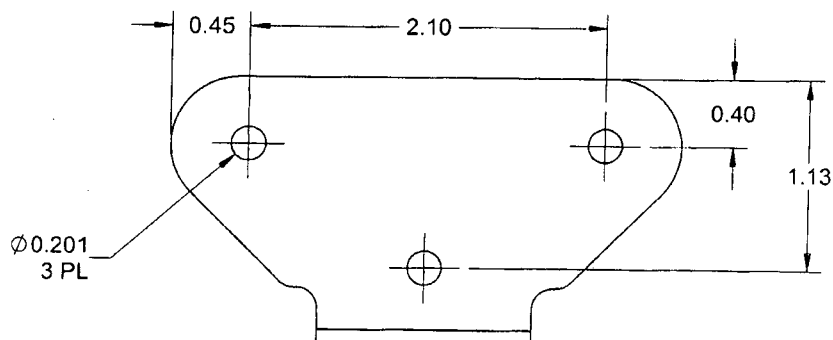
LOCATION OF D4330-3 DOOR BRACKET MOUNTING HOLES
